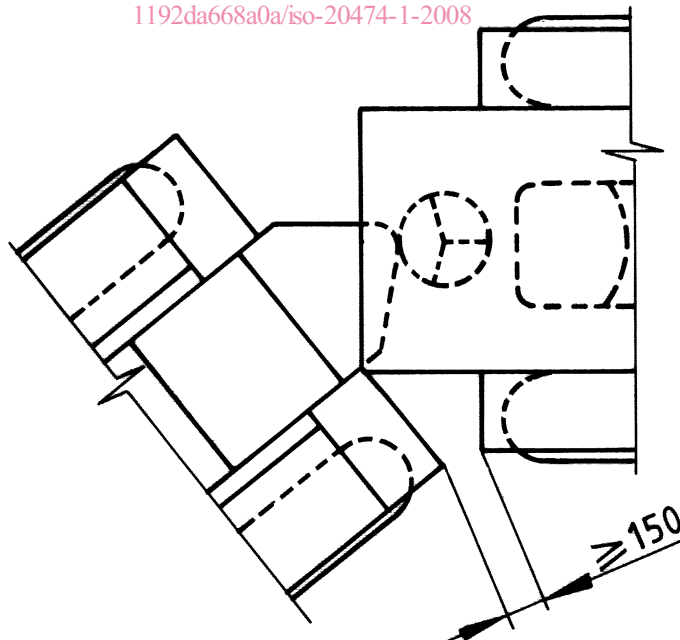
Minimum clearance of lower limbs at access to operator's station on machines with articulated steering
